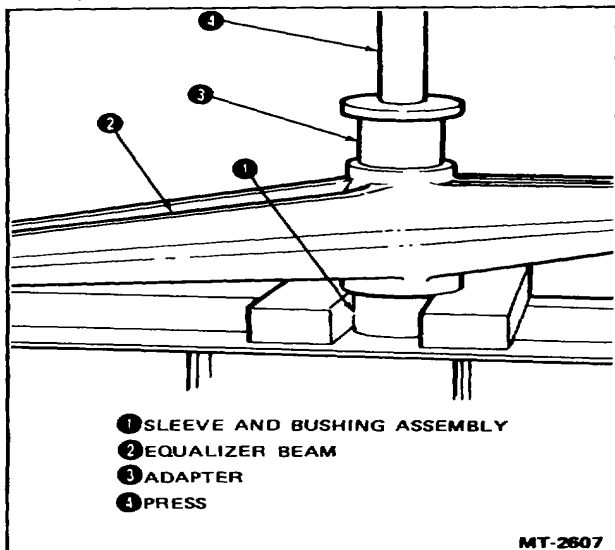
Removing Equalizer Beam Center Sleeve and Bushing
